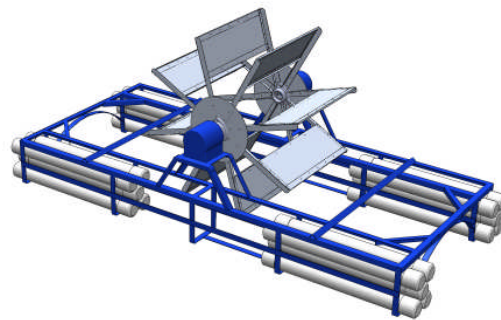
Floating waterwheel with supporting PVC pipes on sides.
